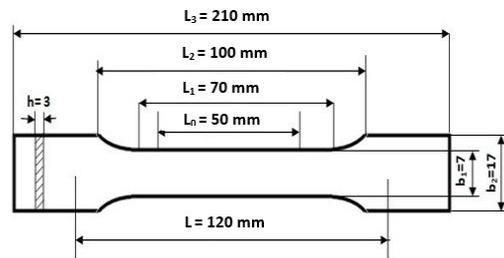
a : Shape and dimensions of tensile specimens (NF EN 527-2).
